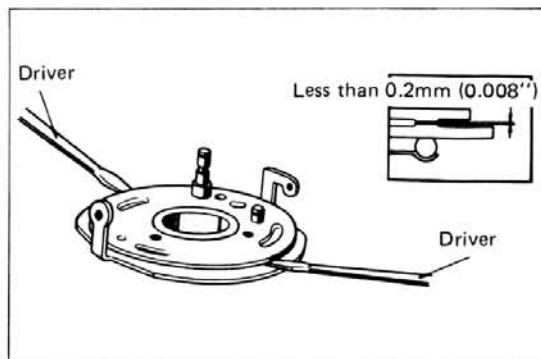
Checking Clearance between Stationary & Breaker Plates
